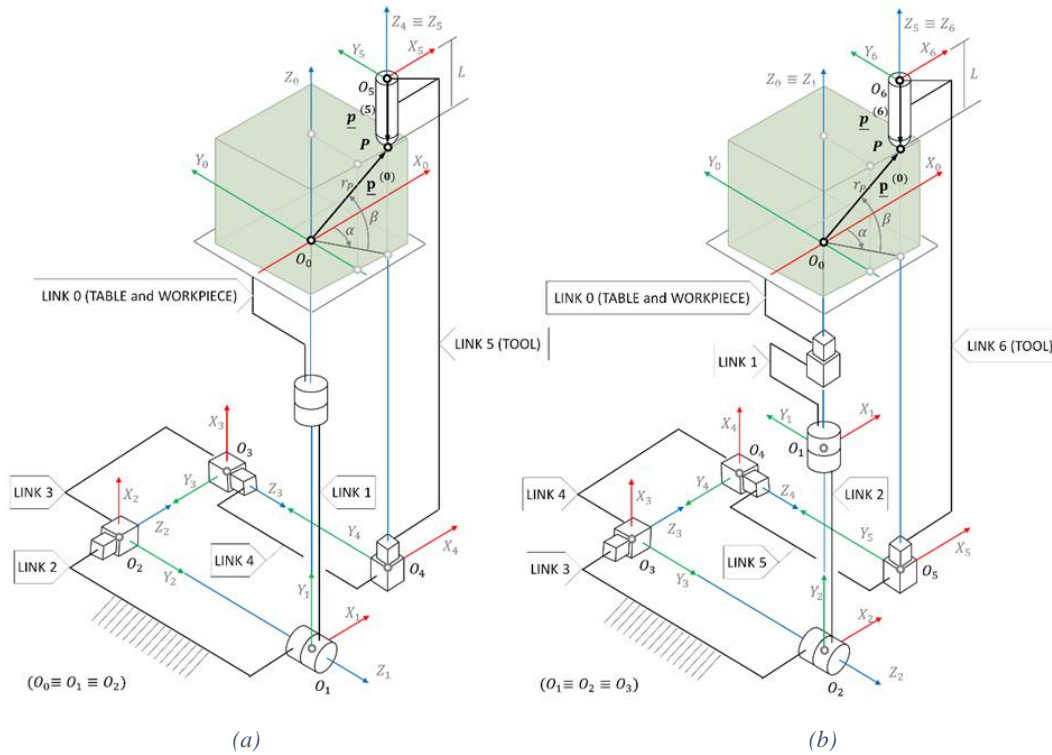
kinematic chain of the RRTTT machine tool (a), and kinematic chain of the TRRTTT machine tool (b)
